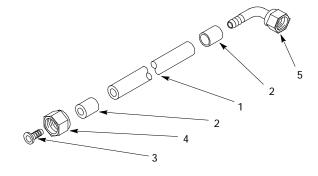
RESEVOIR TANK TUBE ASSEMBLY
